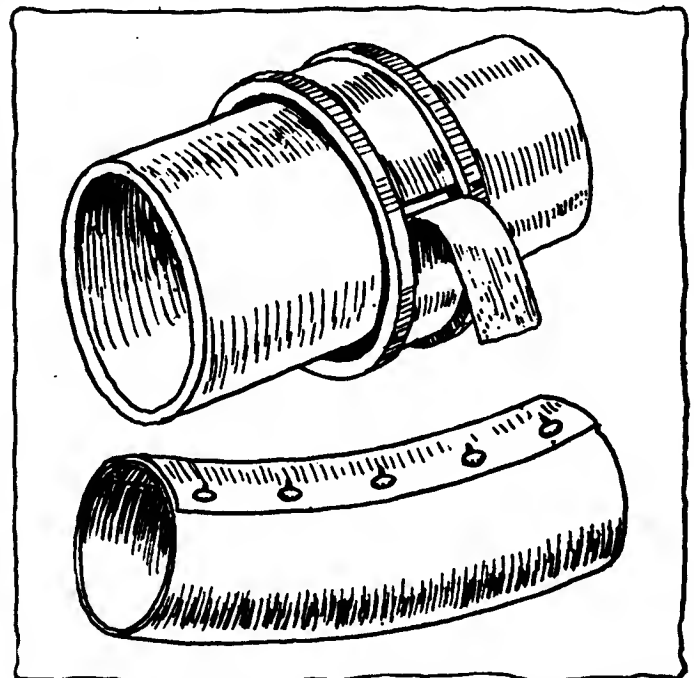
Herz tape grip ring. Fig. 9—Woodworth sleeve
